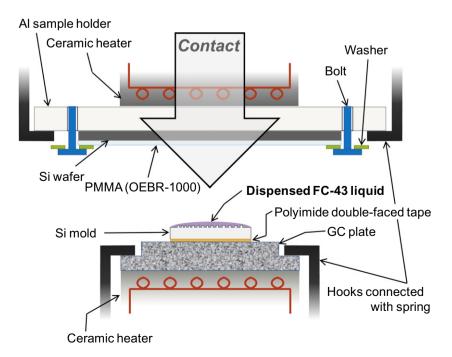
Setup of mold and molding material after a perfluoroalkyl liquid was dispensed on the mold patterns.
